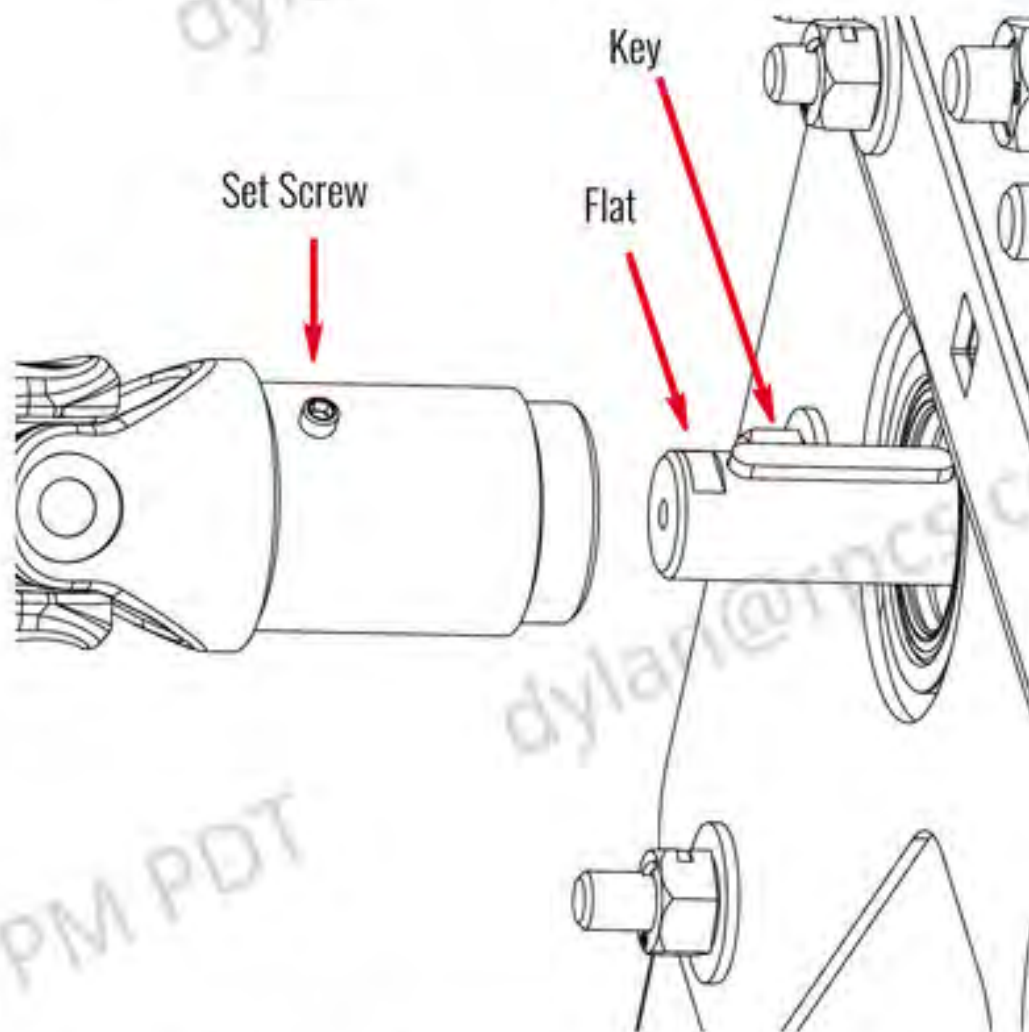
Driveline Setscrew on Same Side as Shaft Key
